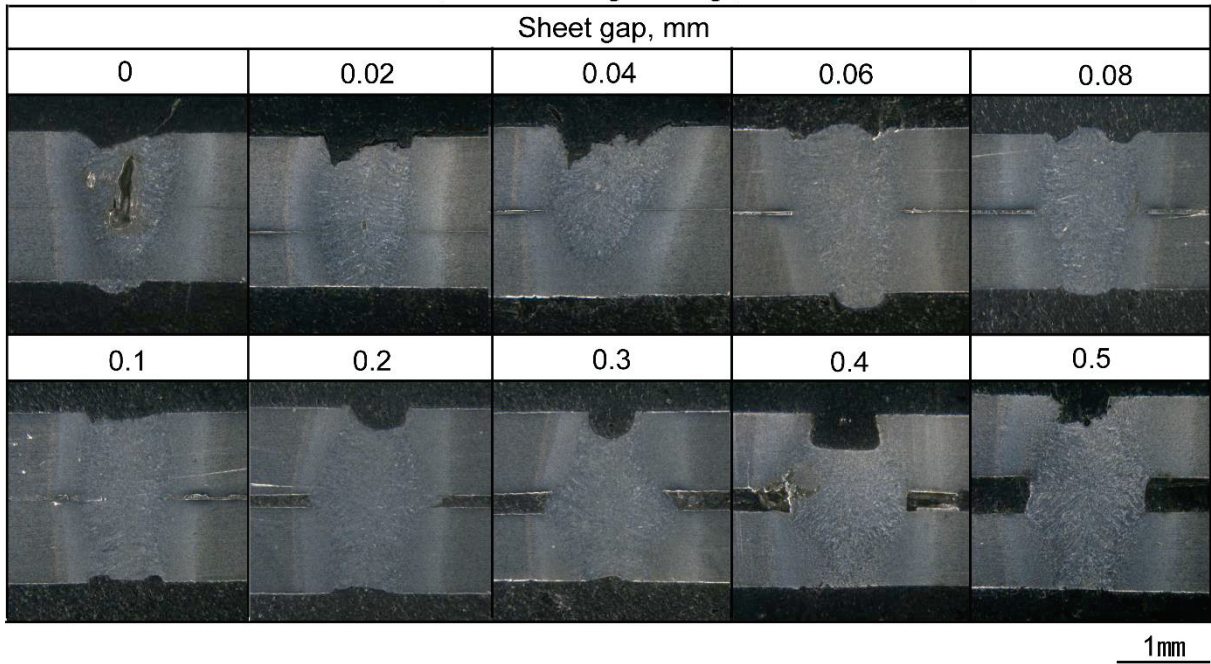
Cross sections of laser lap welded joint of galvannealed steel sheets with 1.0 mm thickness ¹⁰⁾.
